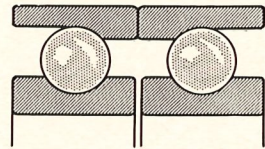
shows an angular contact ball bearing which is made for heavy thrust loads. Note that it has a wide shoulder on one side of the outer race but only a small shoulder on the other side. Because of this, it can withstand end thrust in only one direction. Bearings of this type are generally used in pairs when thrust in both directions must be resisted.
